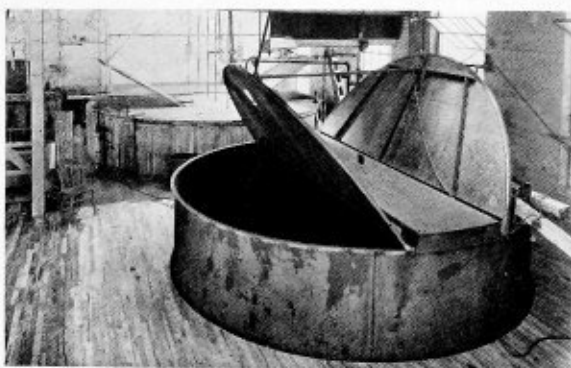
Top of nickel-clad steel soap-boiling kettle, 15 feet diameter by 29 feet deep. Joints lapped, wide space riveted and welded
